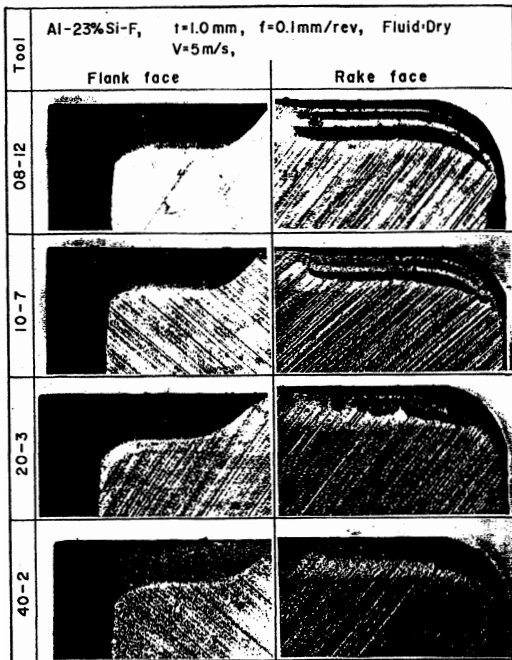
Aspects of flank and rake wear in machining Al-23%Si-F alloy. (cutting speed: $V=5\text{m/s}$, fluid: dry)
